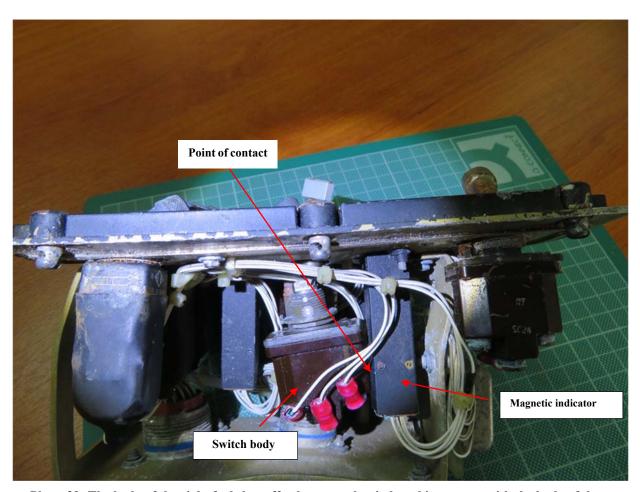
The body of the right fuel shut off valve control switch and its contact with the body of the valve's position magnetic indicator.
